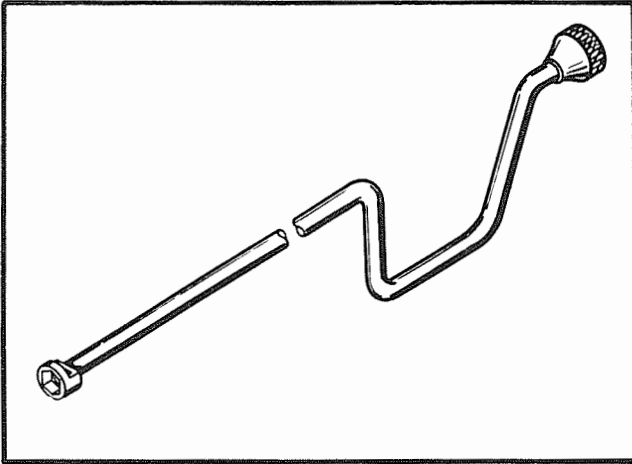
Cylinder Hold-Down Cap Screw Speed Wrench
